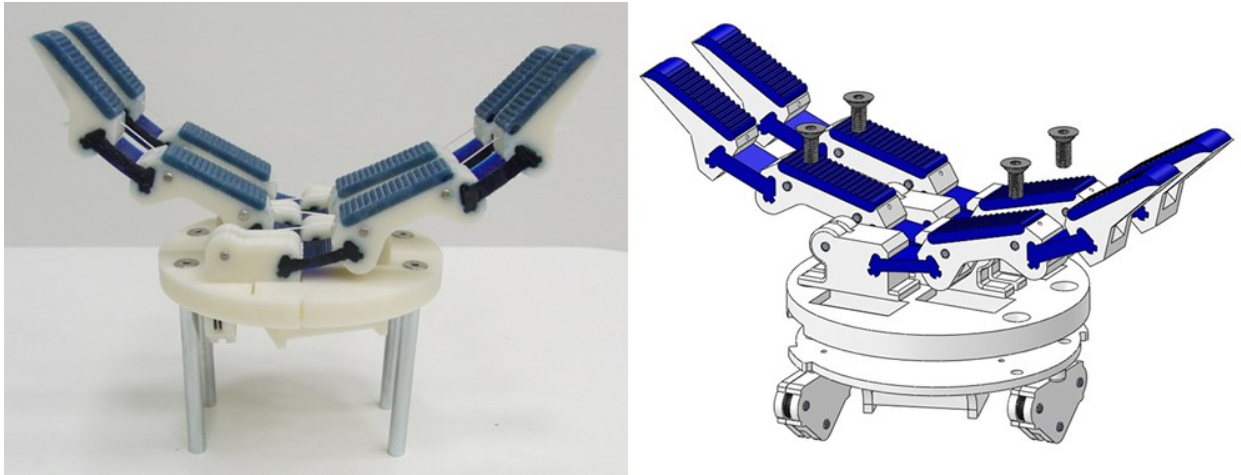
Components and assembly of the top frame sub-assembly. Note the lack of fasteners. Plate a2.stl is used to clamp the fingers in place. Fingers should be inserted from the top of part a2.stl
